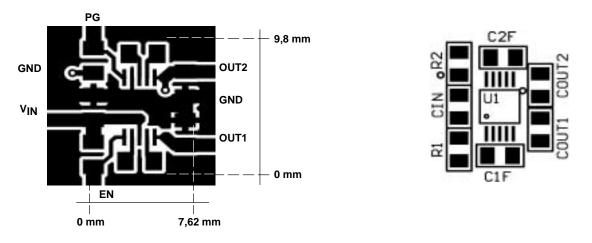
Recommended PCB Layout for TPS6030x (top layer)
